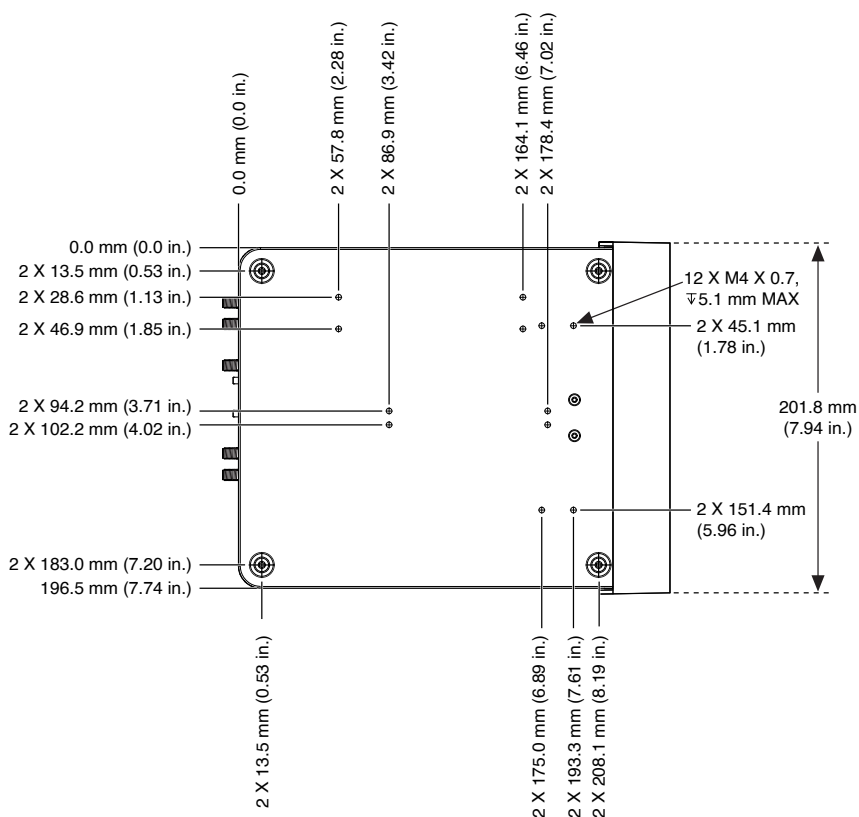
mmRH-5591 Mechanical Dimensions, Bottom View
